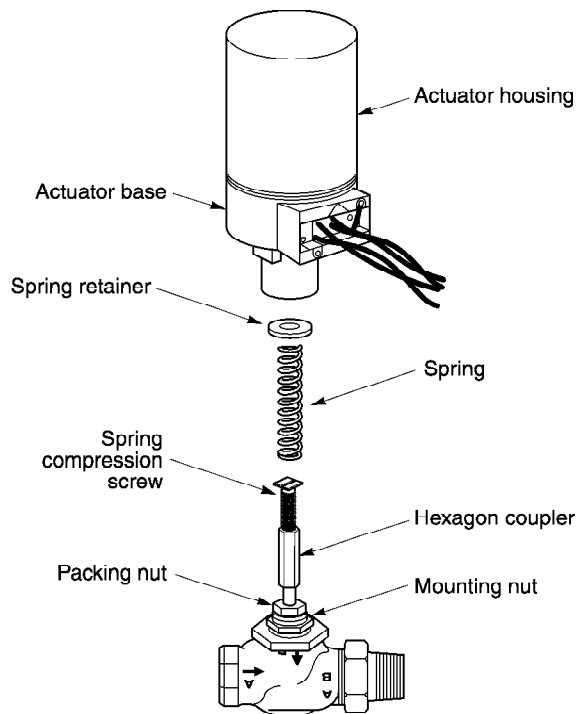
Assembly of AV-600 Linkage Kit onto VB-7XXX Series Valve.
